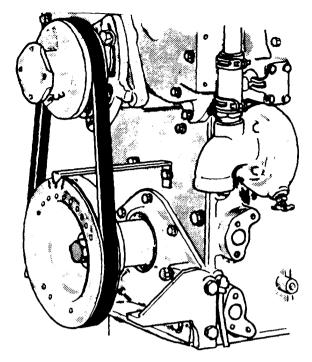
B-145. Pointer Installation for Marking Top-Dead Center
